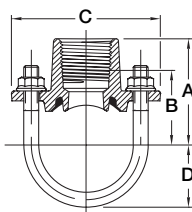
MECHANICAL TEE GROOVED OUTLET
